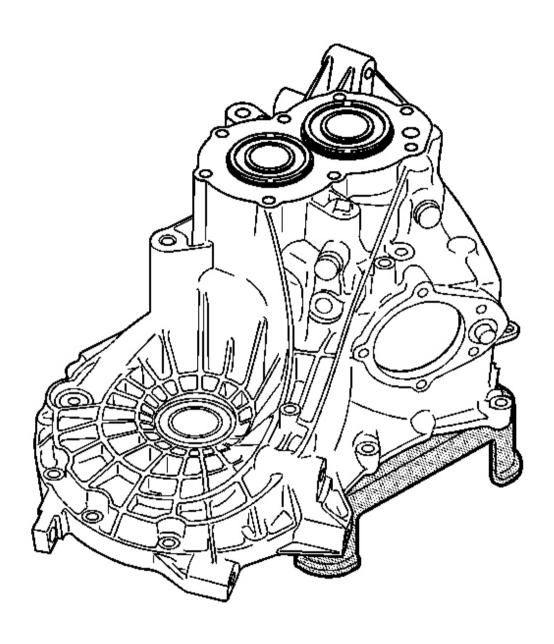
Turning Transaxle Case On Onto J 44375 Courtesy of GENERAL MOTORS CORP.
